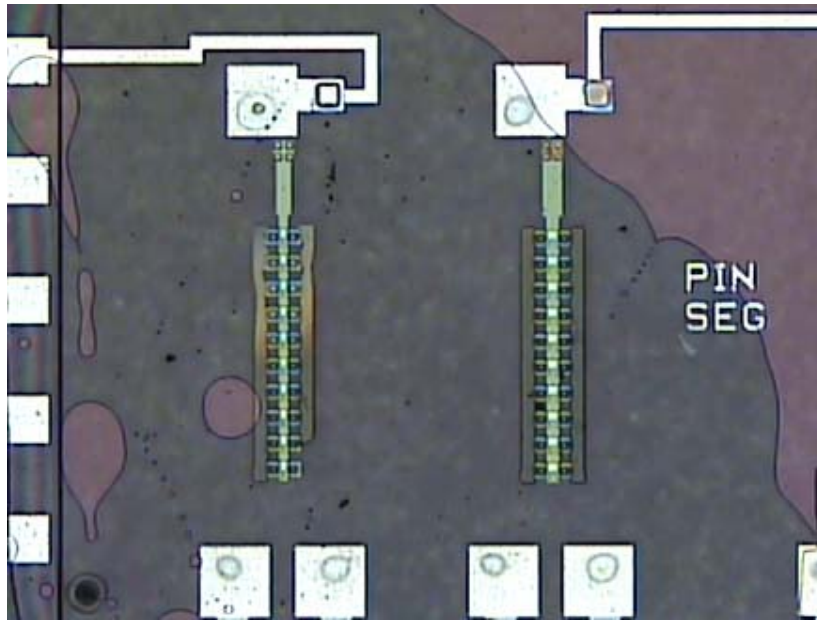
BCB cracking after dicing and sawing for test structures.
